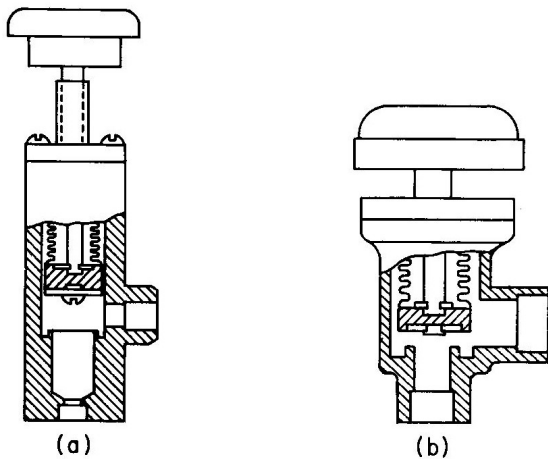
Angle valves. (a) Machined from bar stock. (b) Cast.
